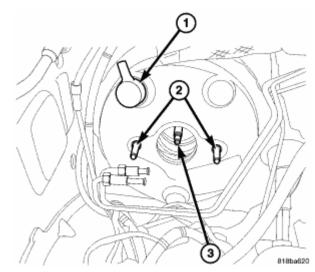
BRAKE BOOSTER Courtesy of CHRYSLER LLC
